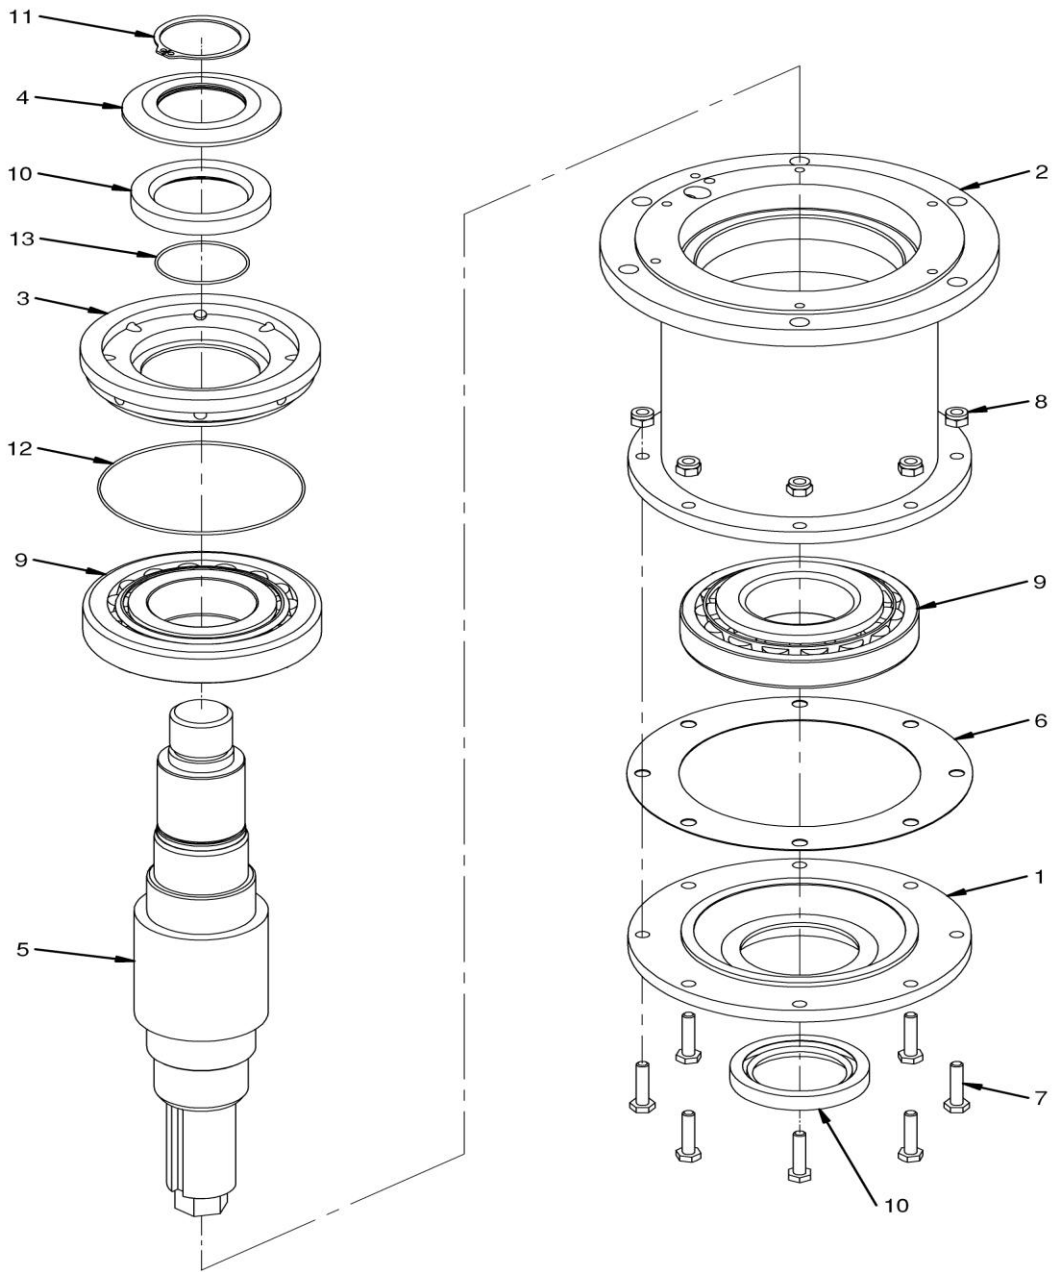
IMPELLER DRIVE ASSEMBLY
